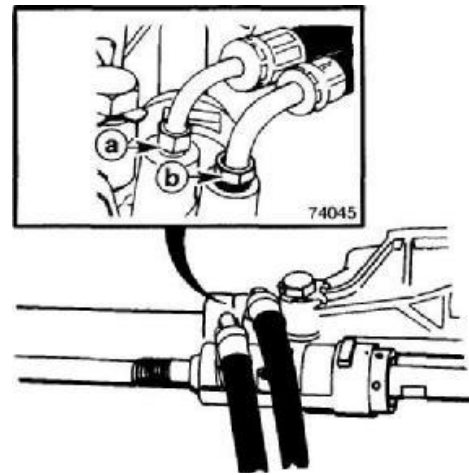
Delivery (a) and return (b) of the power steering tube for Mercruiser Bravo® stern drives
